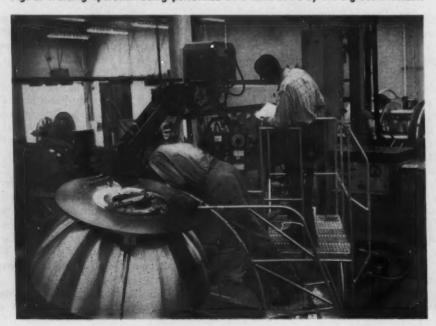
Another view of the operation in Fig. 5 which shows a typical welding fixture that promotes welding performance.
